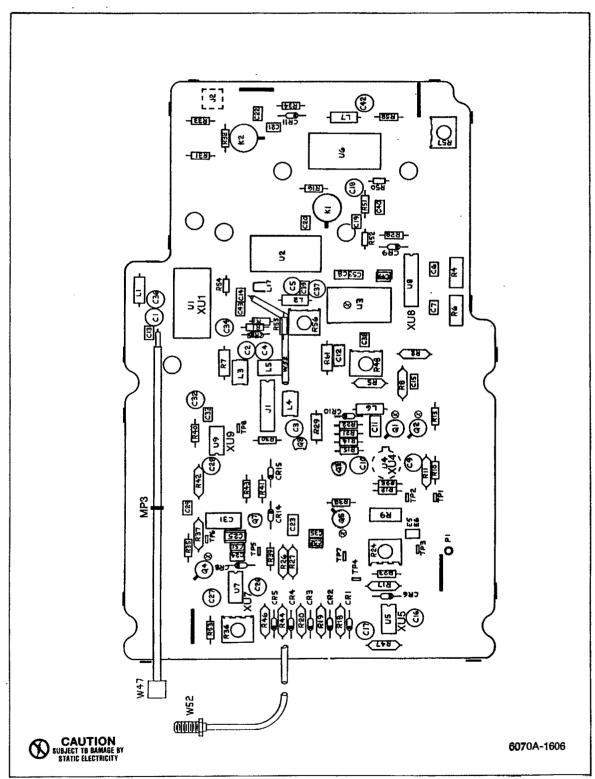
A4A7 Output Amplifler PCB Assembly (6070A)
